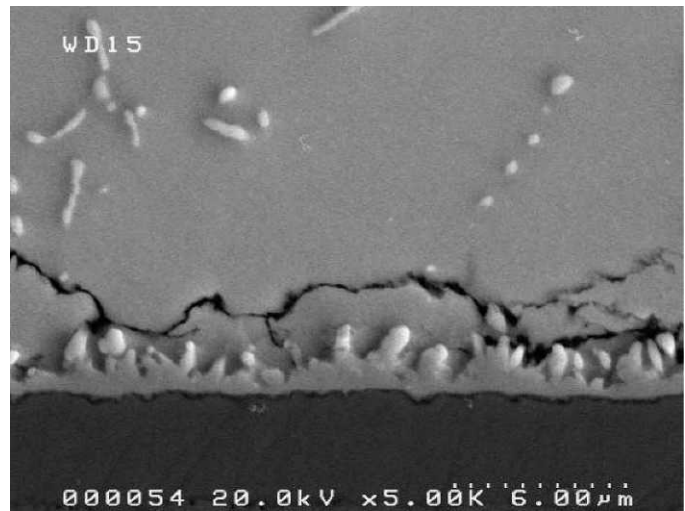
Board side failure of BGA with SAC305 solder on ENEPIG finish (170°C T_g board), × 5,000 magnification.
